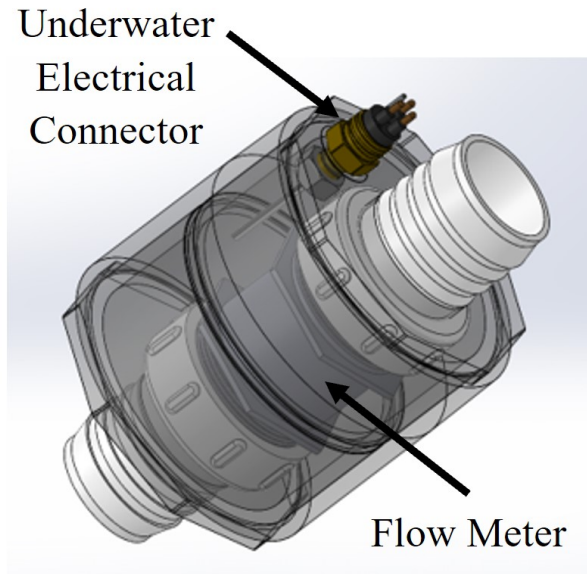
Custom designed flow meter housing assembly shown in CAD SolidWorks software.
